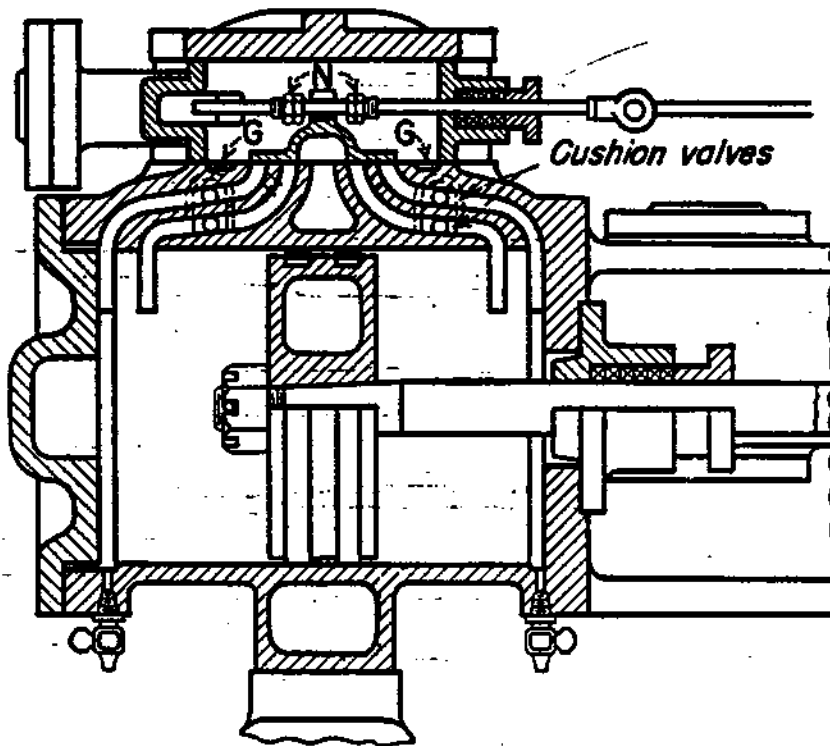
Large duplex steam cylinder with cushion valves and inside adjustable lost motion.
